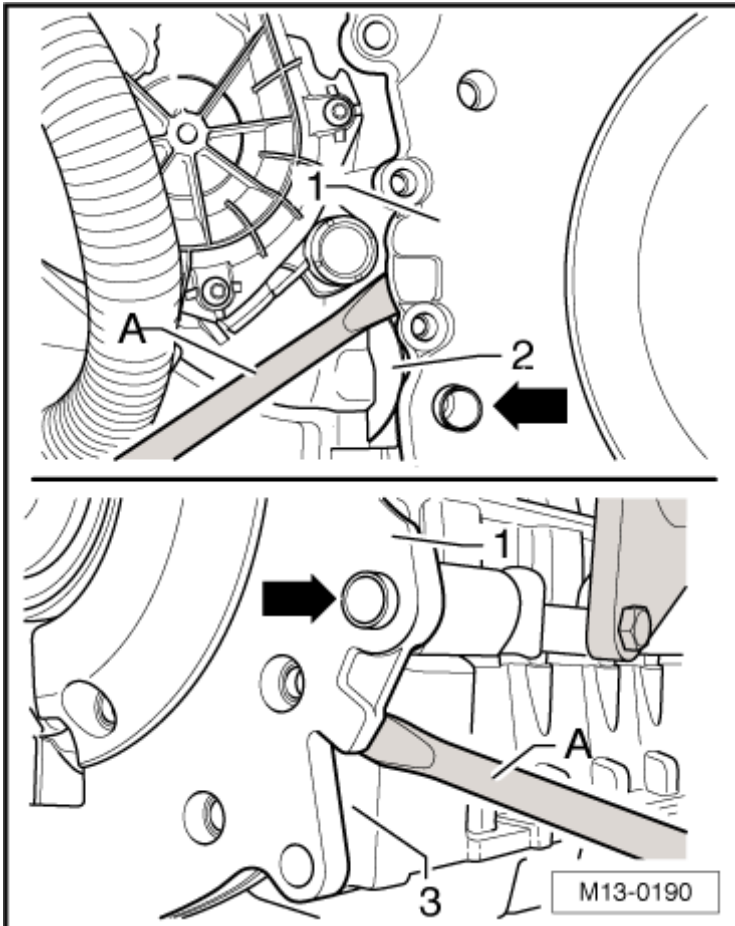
Identifying Screwdriver And Removal Positions For Control Housing Cover From Cylinder Block Or From Upper Section Of Oil Pan
